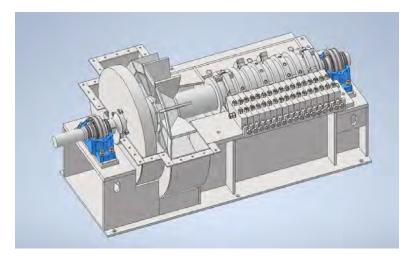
Rotor and Bearing Units Resting in Lower Housing
